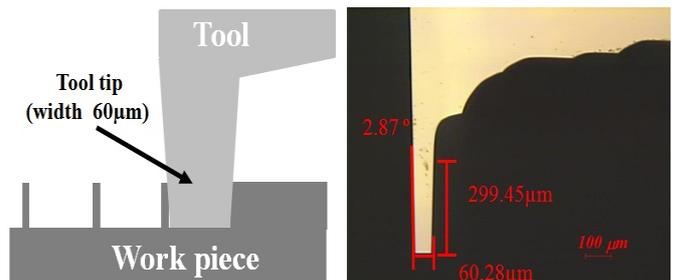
Schematic drawing of fabrication of brass master by micro-machining process, microscopic image of side view of tool tip
